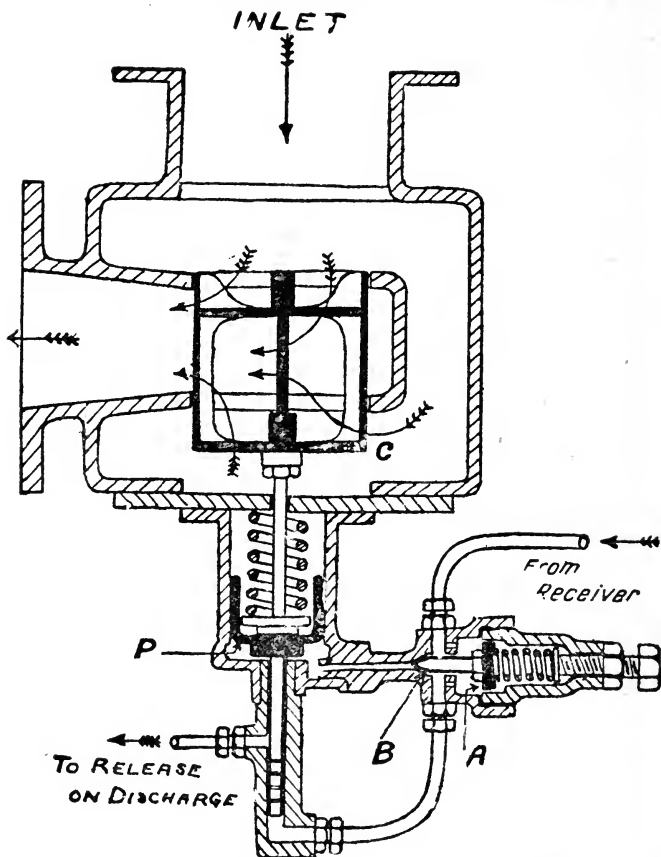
Throttle-Valve Control for "Sentinel" Compressor.
